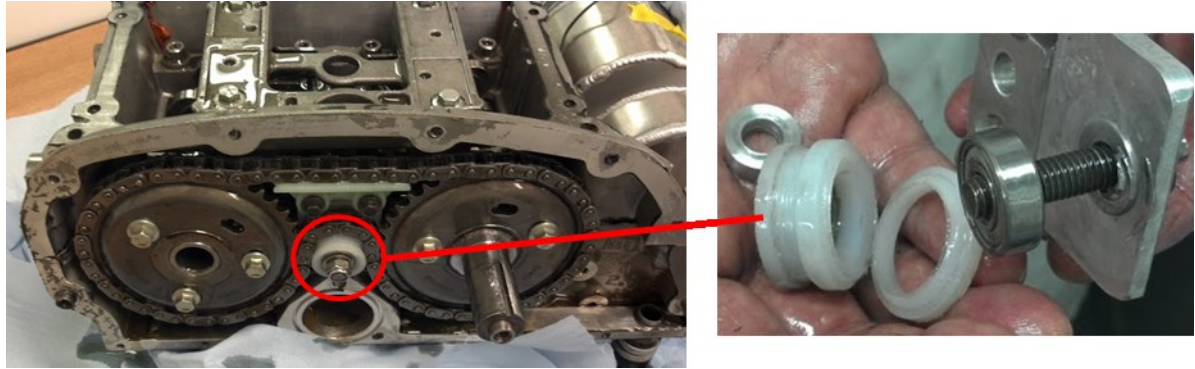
Previous design of the cam drive (left) and the damaged plastic roller (right)
